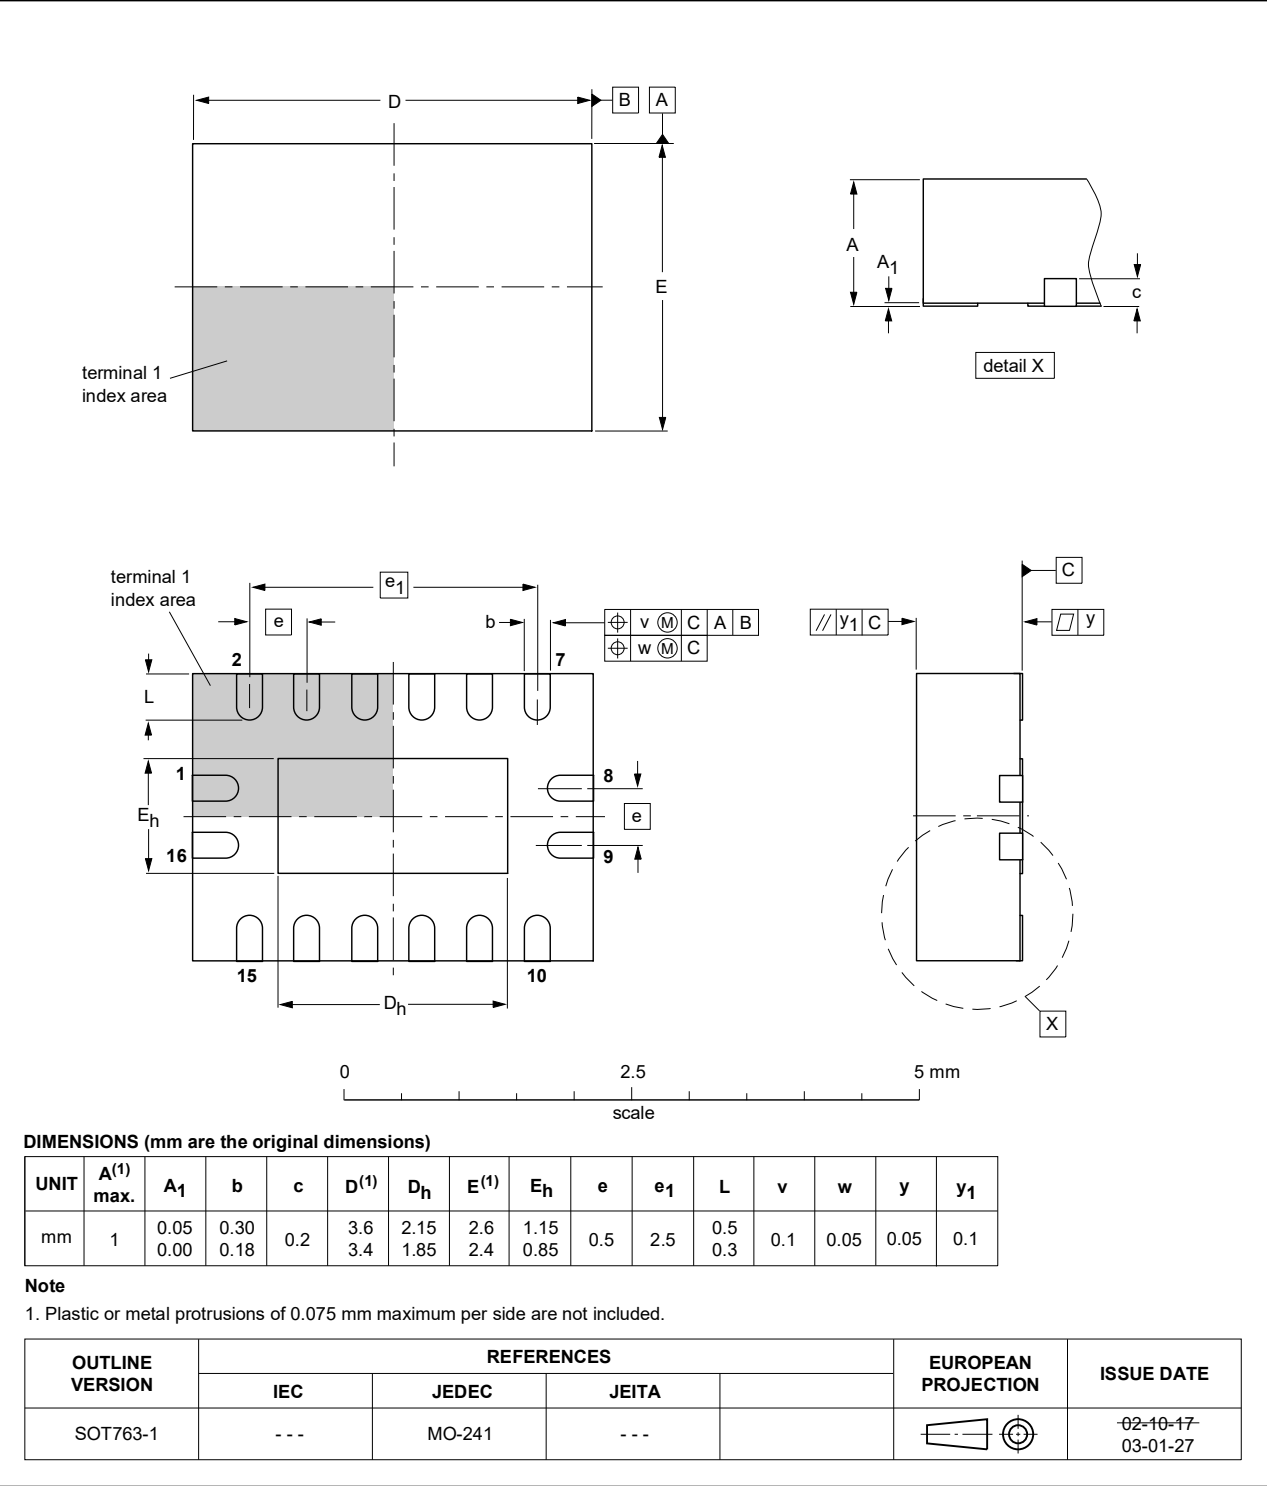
Package outline SOT763-1 (DHVQFN16)
